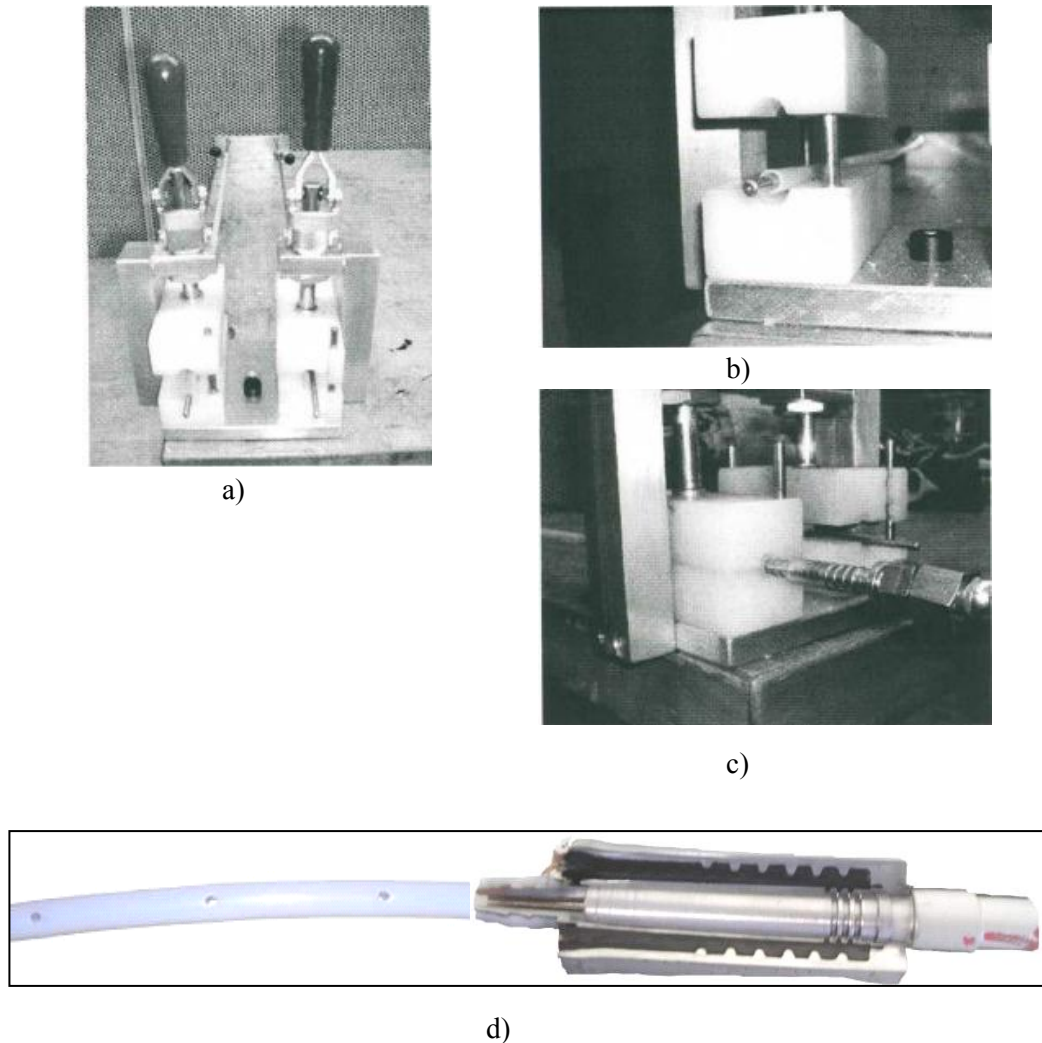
a) Fixture and clamp device b) Plastic tuner inserted over mandrel c) Hose insert / tuner end d) Completed plastic tuner assembly cross-section.
